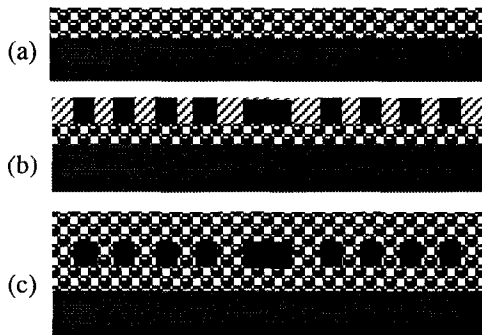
Fabrication steps of EMI shielded spiral type ferrite inductors; (a) Composite material is screen-printed on glass, (b) Plating mold is formed and filled with plated copper, (c) Mold is removed and composite is screen-printed
